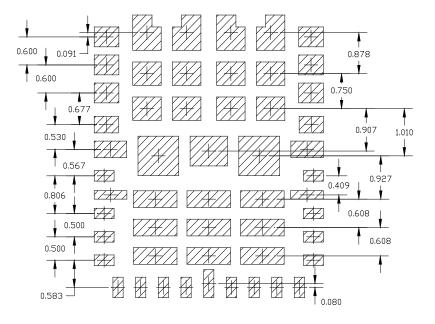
Stencil Pad Spacing Detail 2 (Dimensions in mm)
